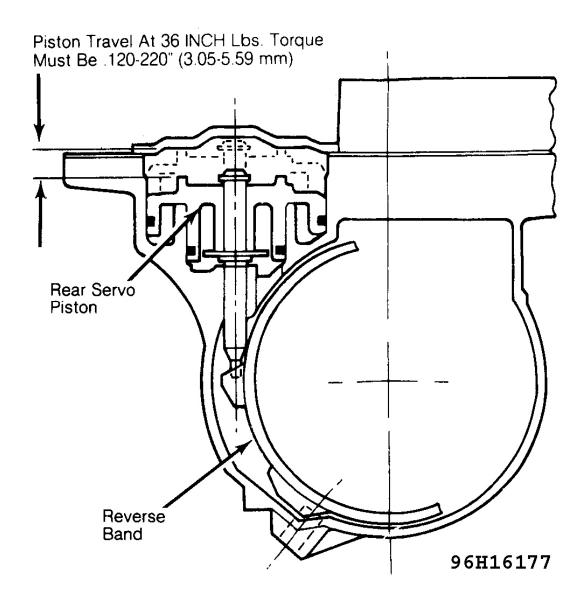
Rear Servo Piston Travel Measurement Courtesy of FORD MOTOR CO.
